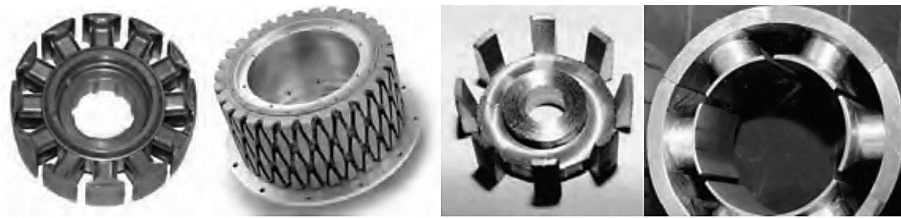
Example of motor parts fabricated using soft magnetic composite (SMC) [17]
